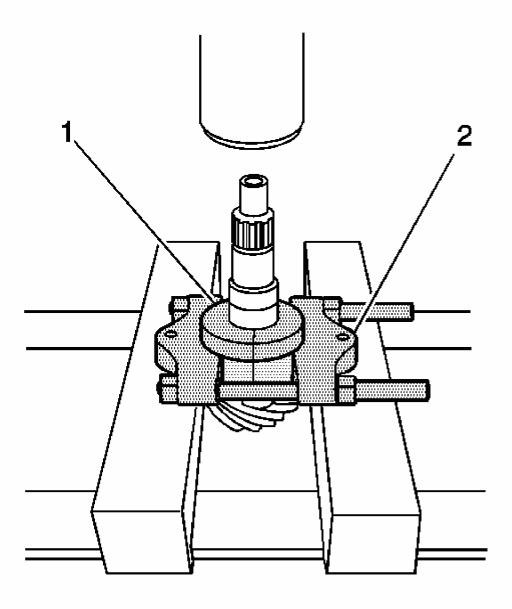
Installing J 45871 Around Pinion Bearing Courtesy of GENERAL MOTORS CORP.
